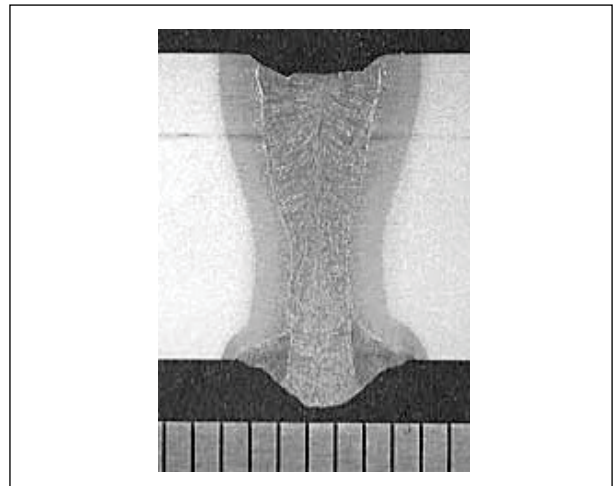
Macro of a hybrid Nd:YAG laser/MAG full penetration weld in 11mm steel section (Source: Dolby RE 2003)
